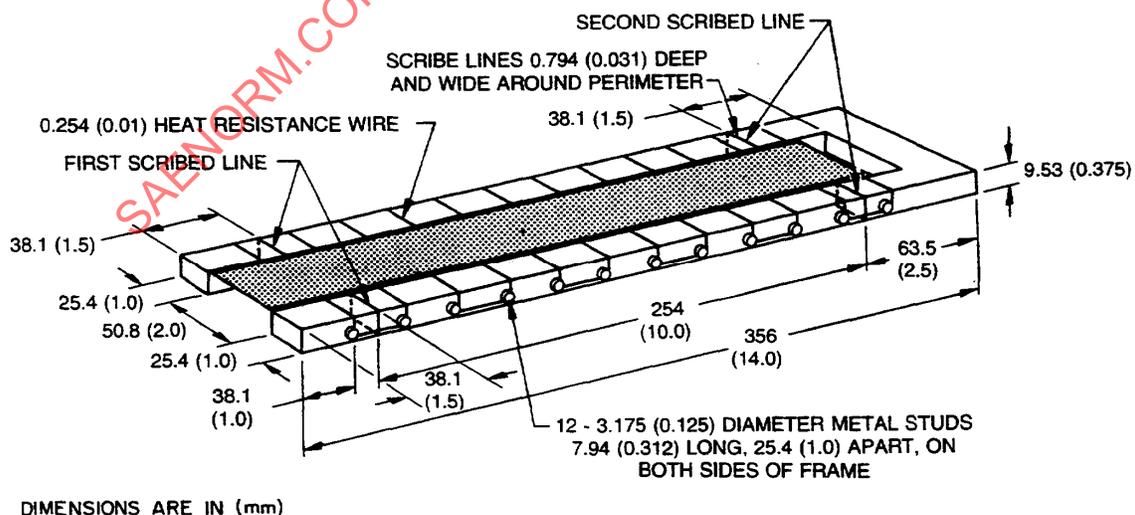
BOTTOM U-SHAPED WIRE FRAME USED FOR SPECIMENS THAT ARE 51 mm OR LESS IN WIDTH OR THAT BURN NONUNIFORMLY USED IN CONJUNCTION WITH EITHER FRAME SHOWN IN FIGURE 1
